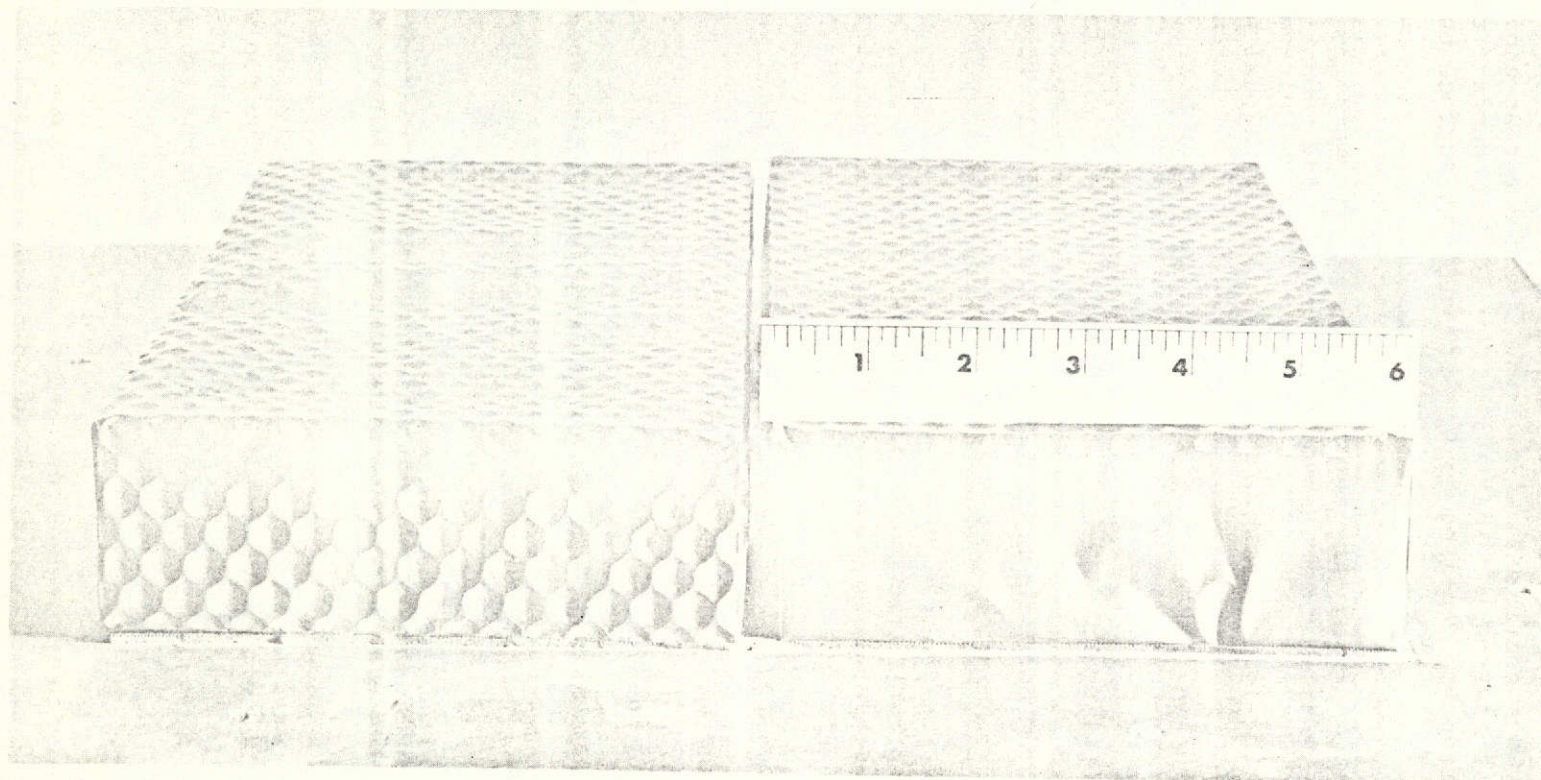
END VIEW OF SPECIMENS 7 AND 8 SHOWING COMPRESSIVE
